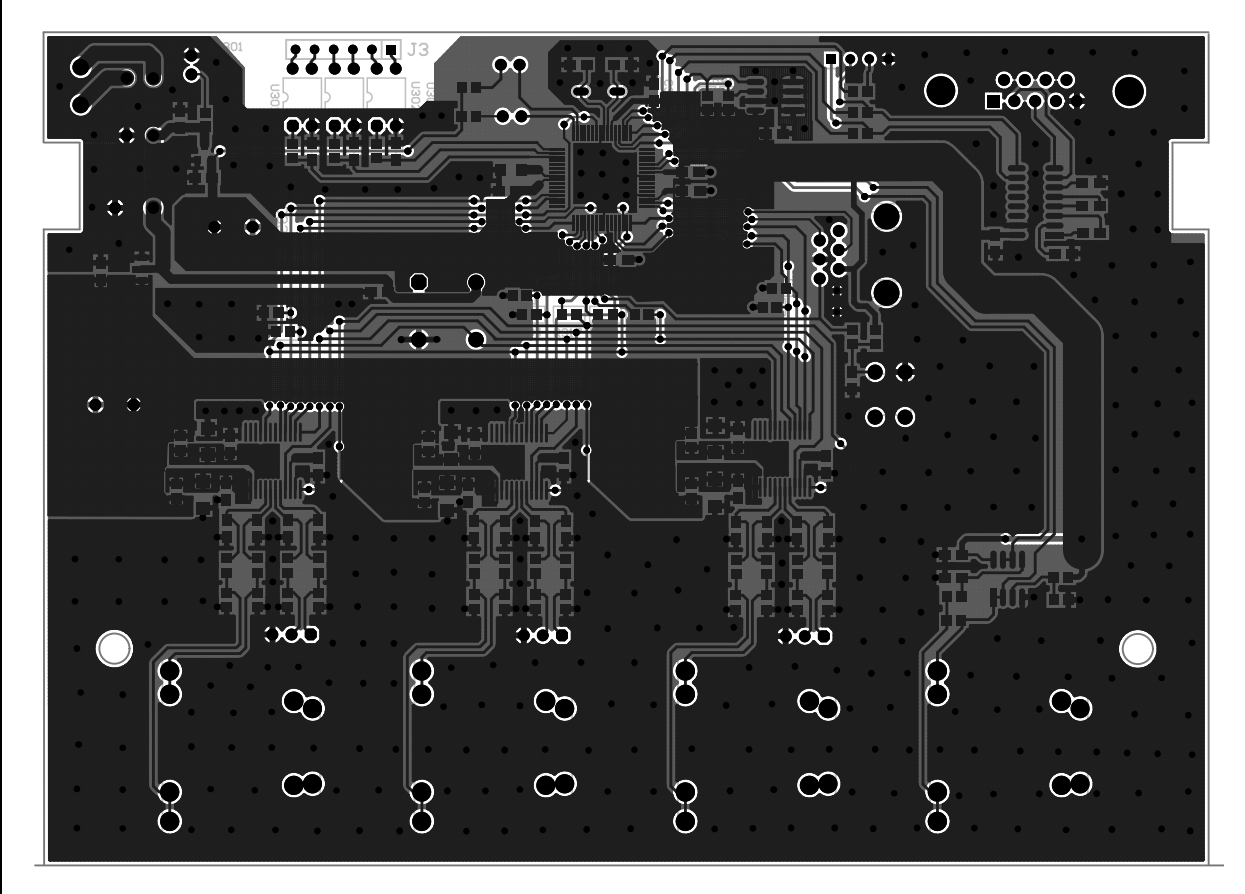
MAIN BOARD LAYOUT - ASSEMBLY DRAWING
